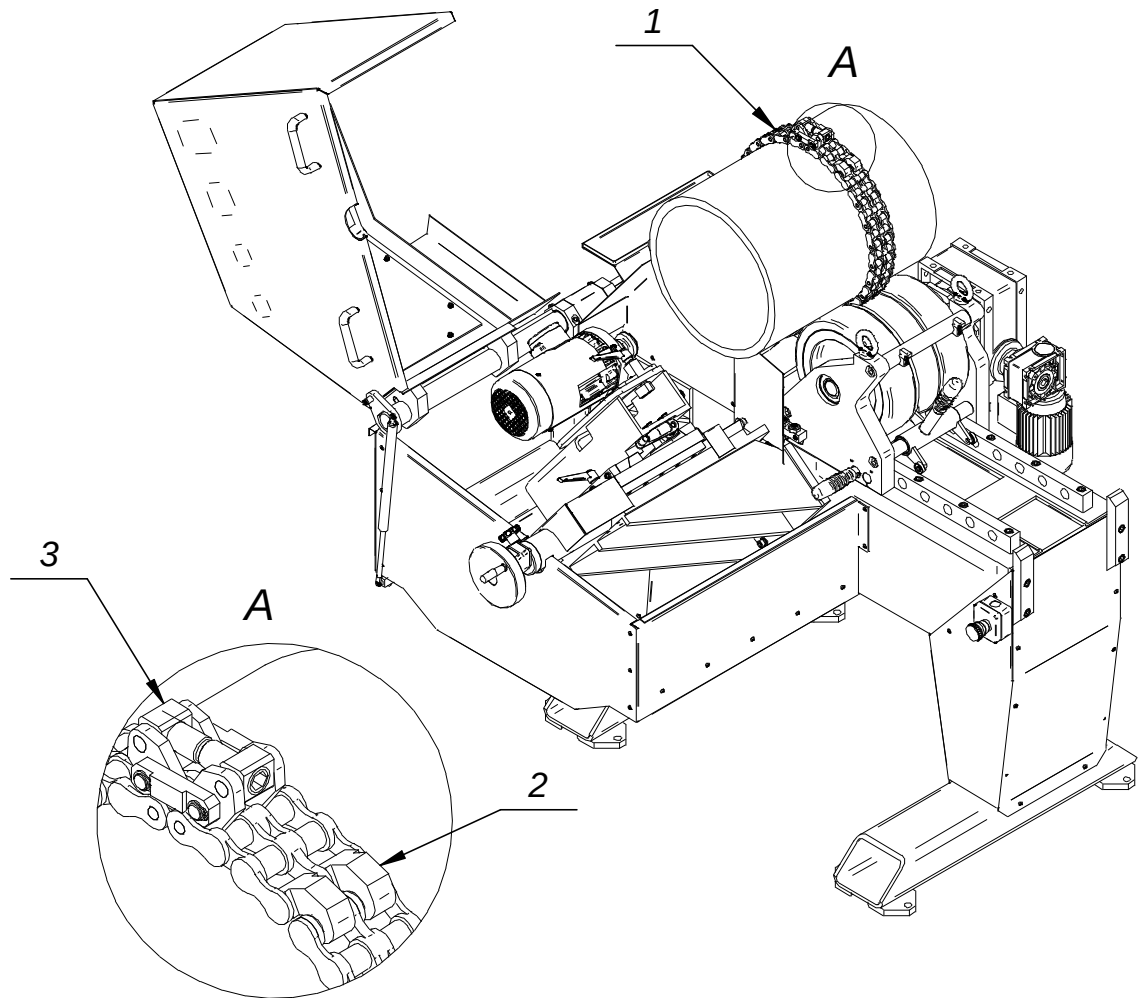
Installing guiding chain: 1 – guiding chain, 2 – catch, 3 – tightener
